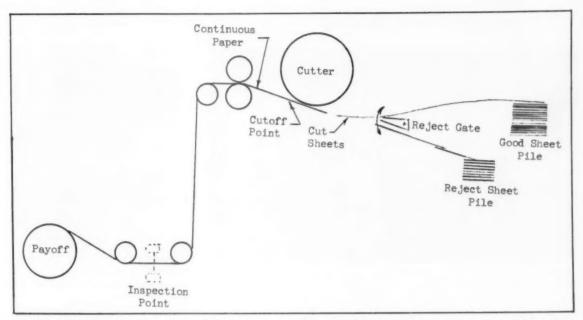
Modern sheeter-sorter automatically inspects, classifies and piles sheets cut from a continuous roll into good and rejected sheet piles.
